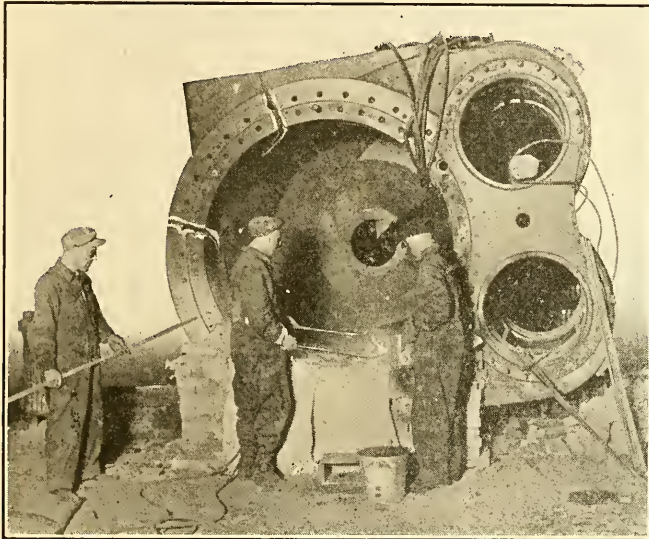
Welding the Low-Pressure Cylinder.
